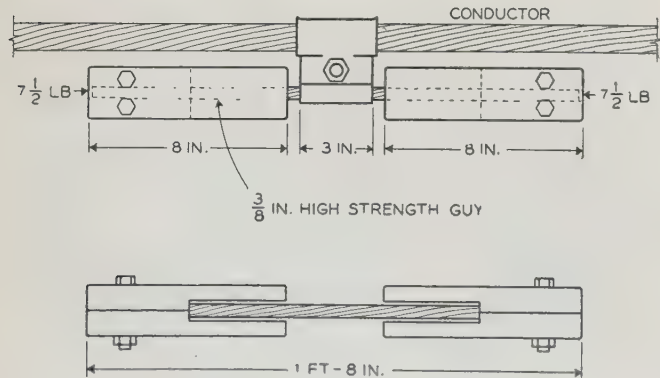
"Stockbridge" type damper used in test, showing above, elevation of damper, and below, plan of damper without clamp
